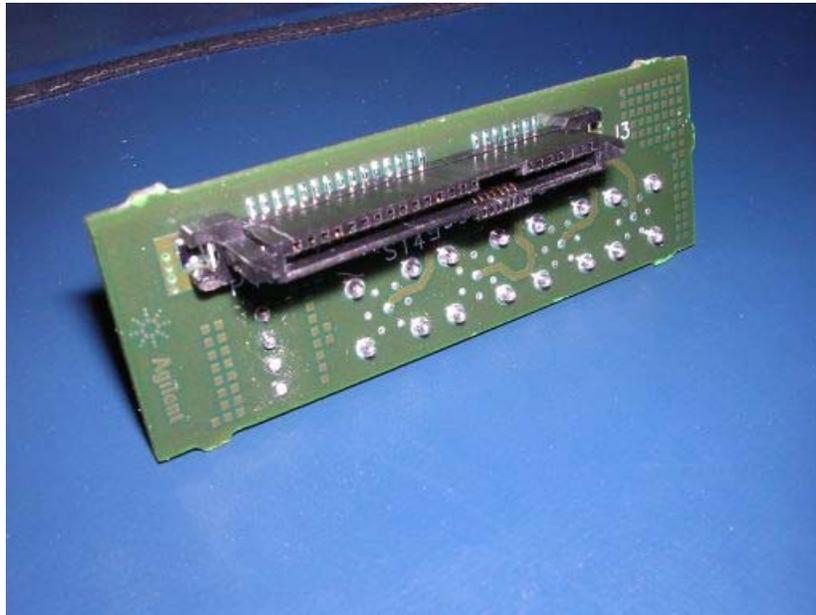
Agilent SAS/SATA Drive Test Fixture (Reverse)
